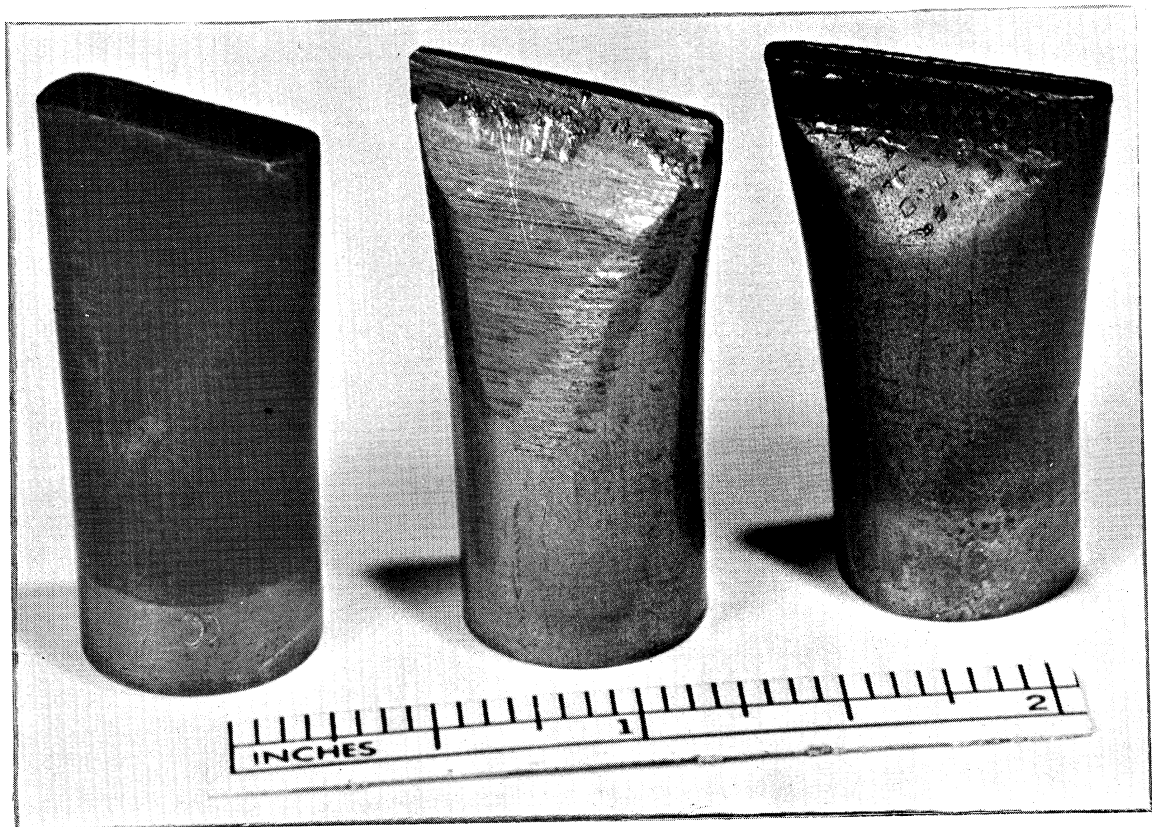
Mixture-jet nozzles. Left to right: Large, small, and medium nozzles.
